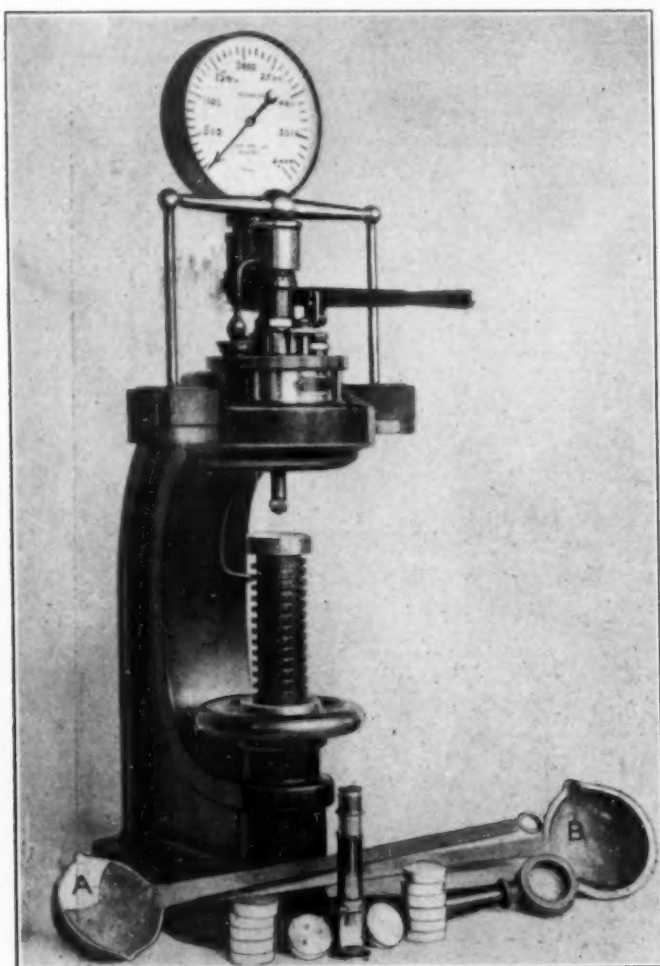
BRINELL HARDNESS TESTING MACHINE, MICROSCOPE, MOLDS, AND LADLES.
